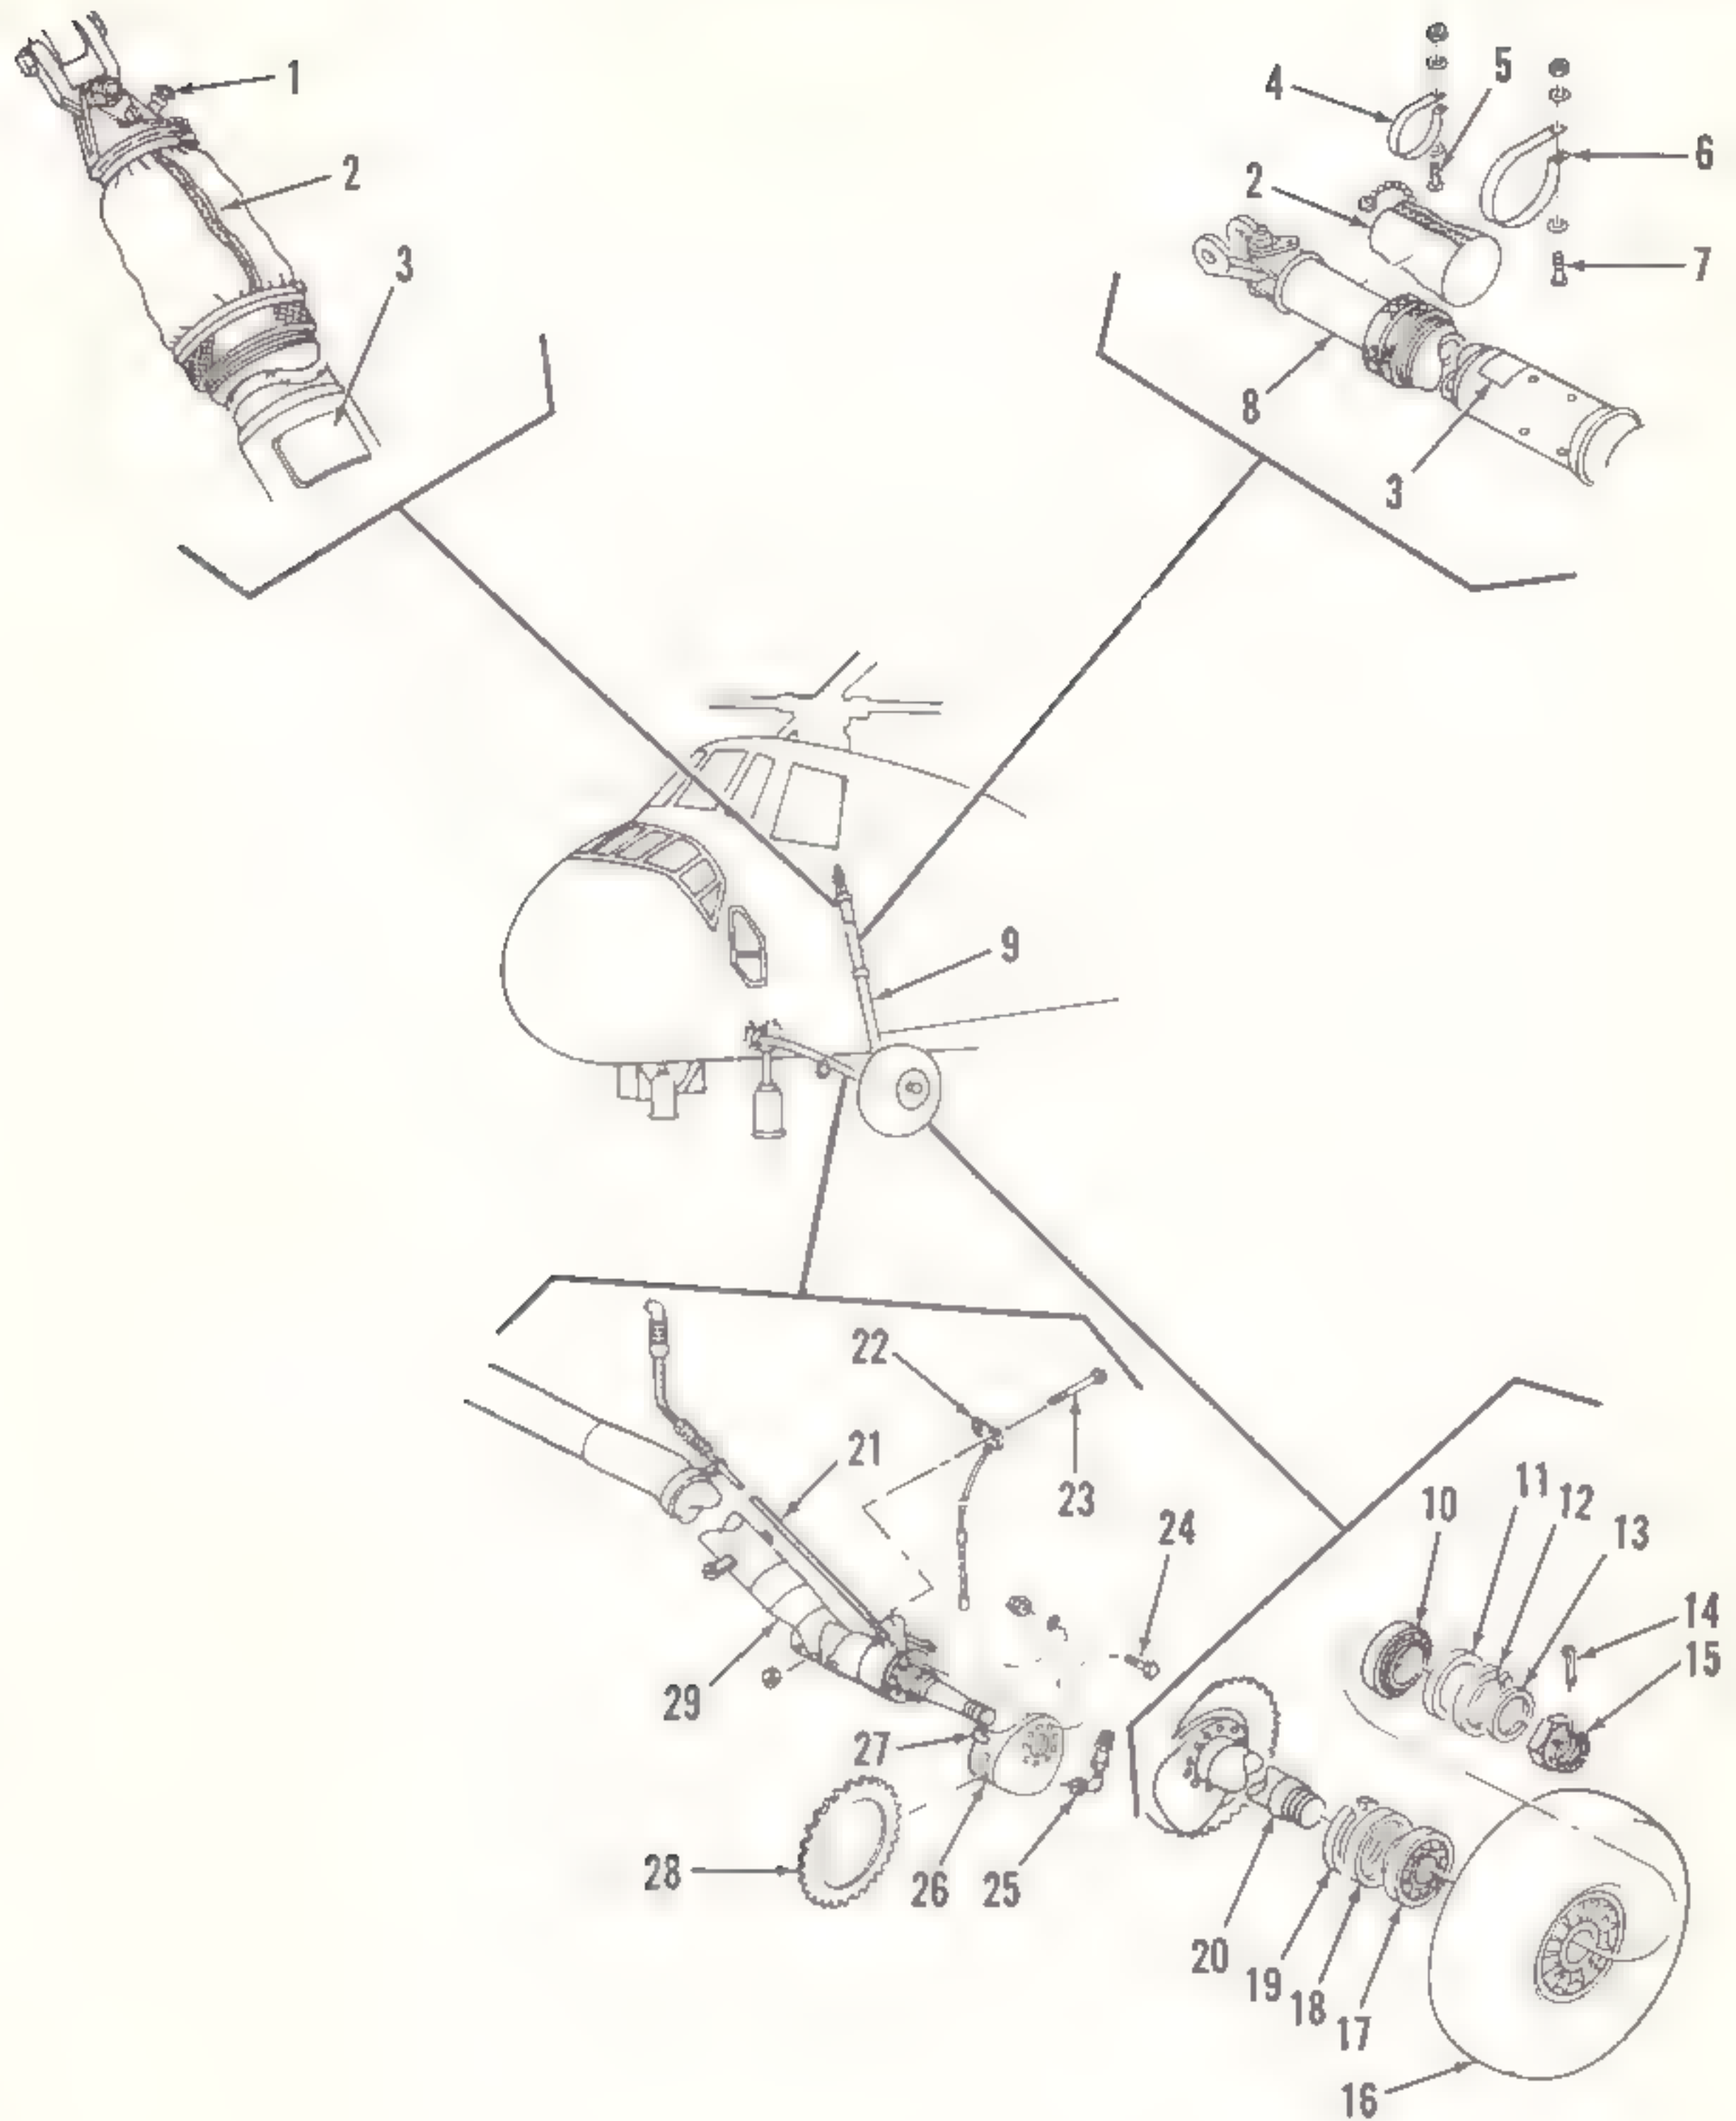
Main landing gear assembly installation (Sheet 2 of 2)
